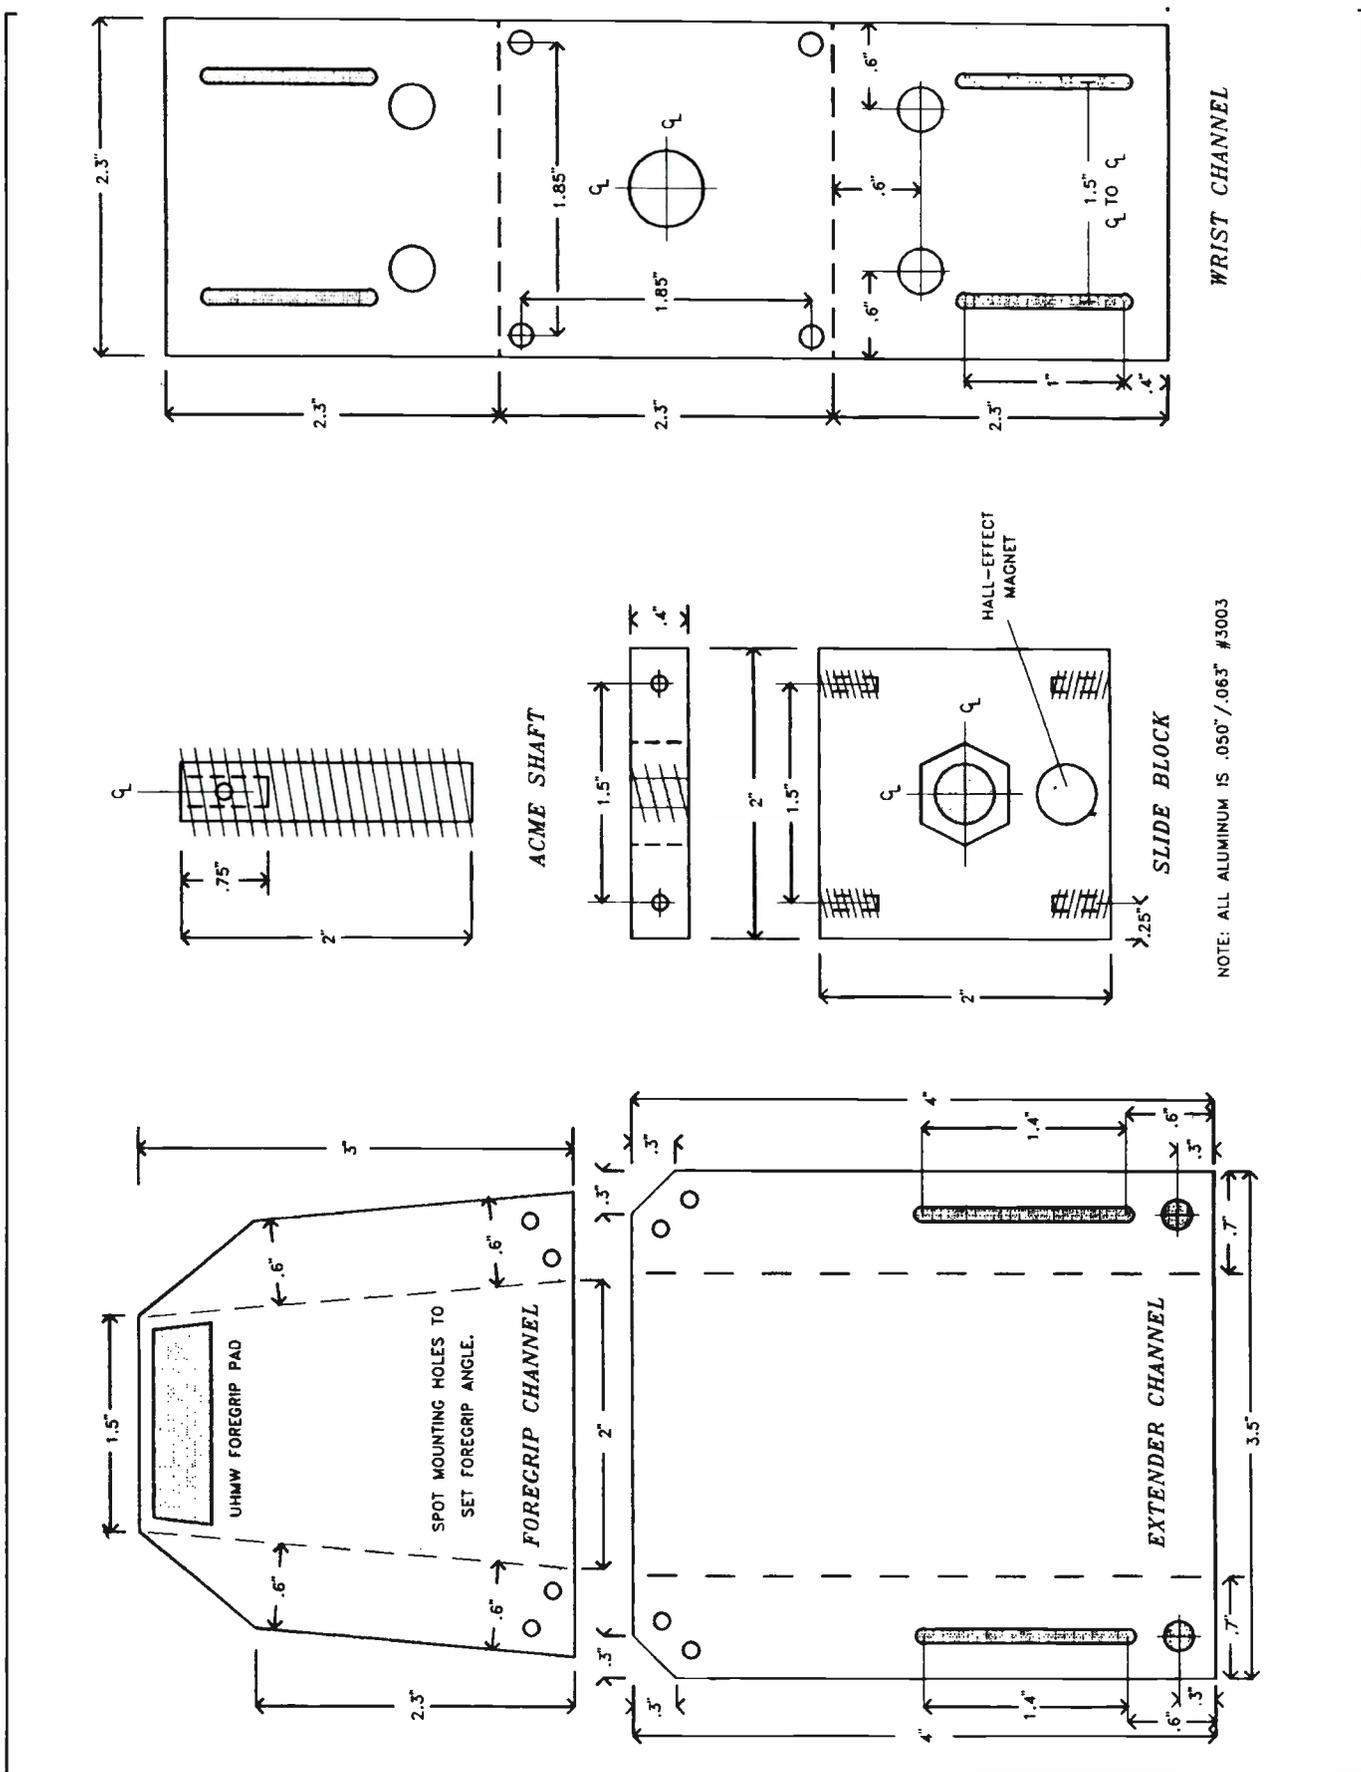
Machining details for mechanical members of CYBER Hand assembly.
